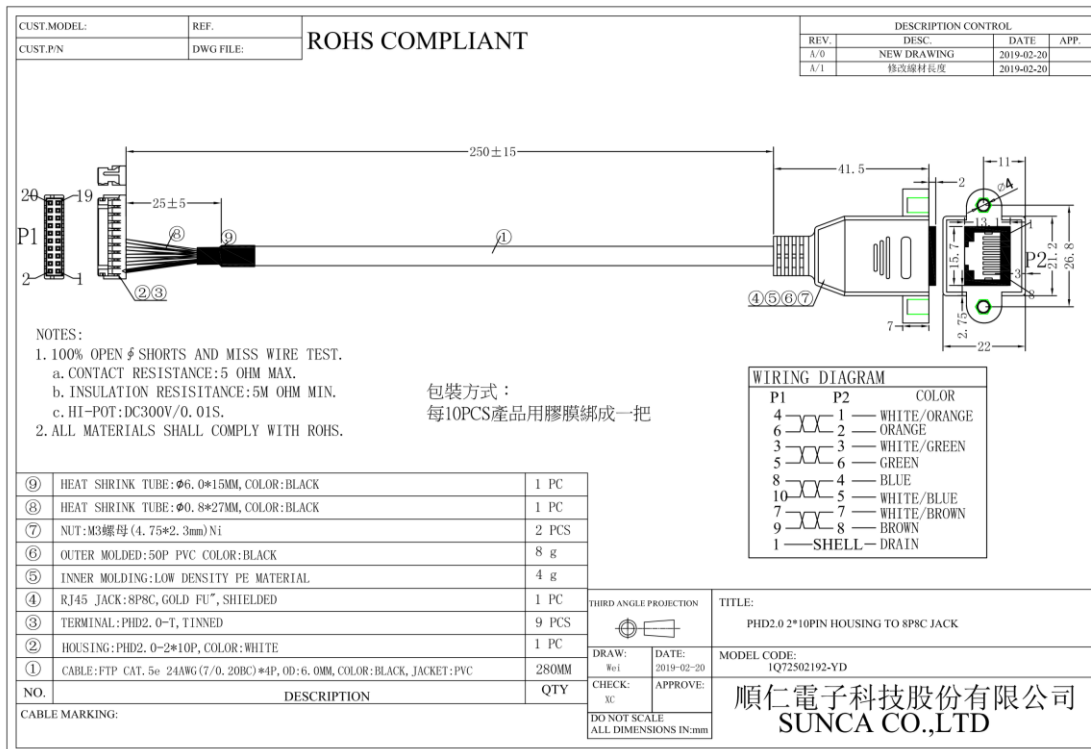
20pin Pitch 2.0 Connector to 1 RJ45 Cable Drawing
